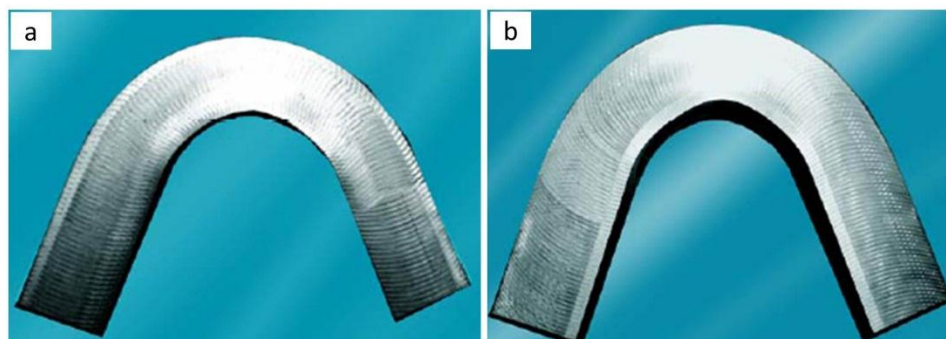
Specimens after bending test. a - clad layer on outer side; b - clad layer on inner side; replotted from [28]
